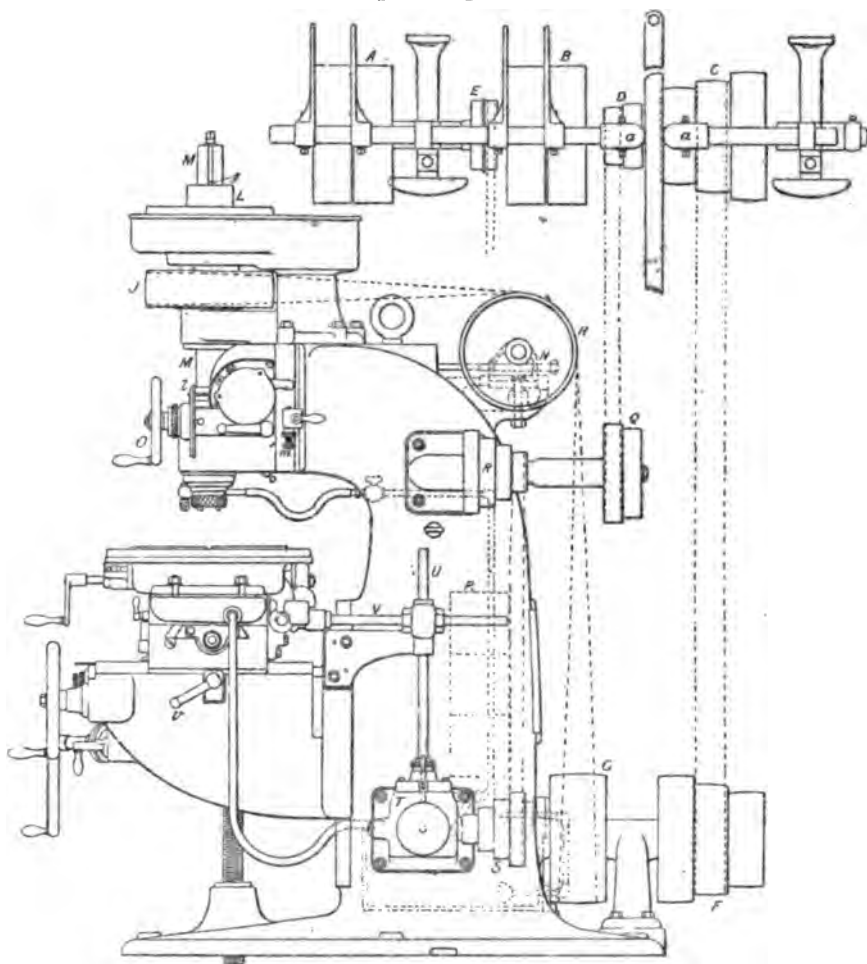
Side Elevation of Herbert Vertical Spindle Machine.
